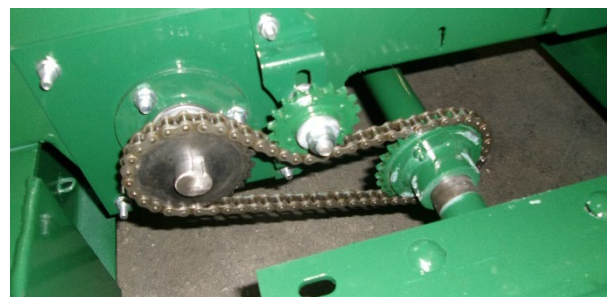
Mill To Mixer Sprocket (Shields Removed For Clarity).
